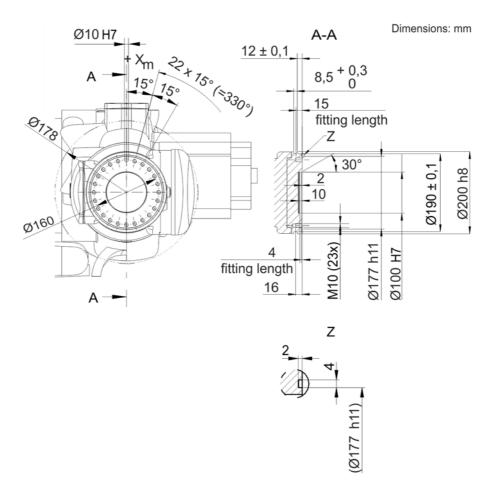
Mounting flange D=160 for F-HP in-line wrist
